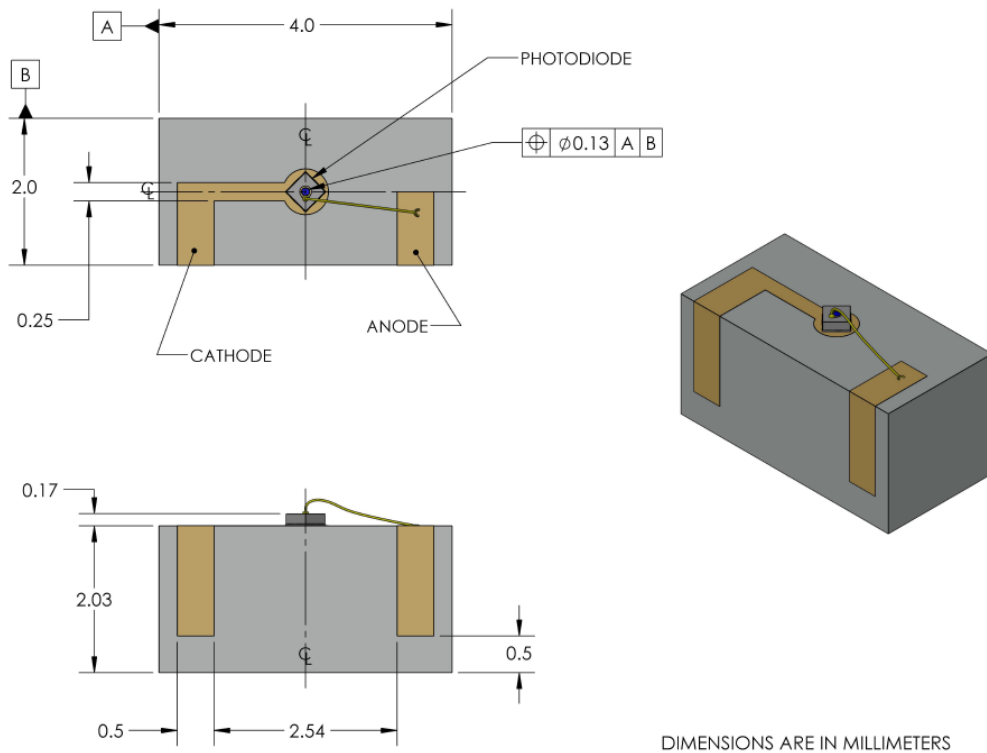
Ceramic Carrier Package Dimension C30645ECERH and C30662ECERH
